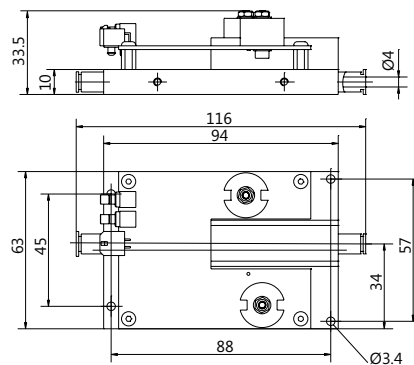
Outline drawing of PCD-UHR series driver with general purpose pad
